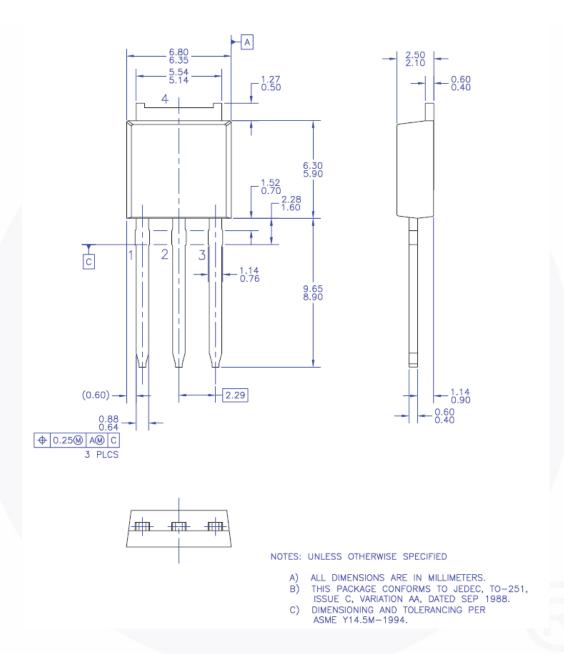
TO251 (I-PAK), Molded, 3-Lead
